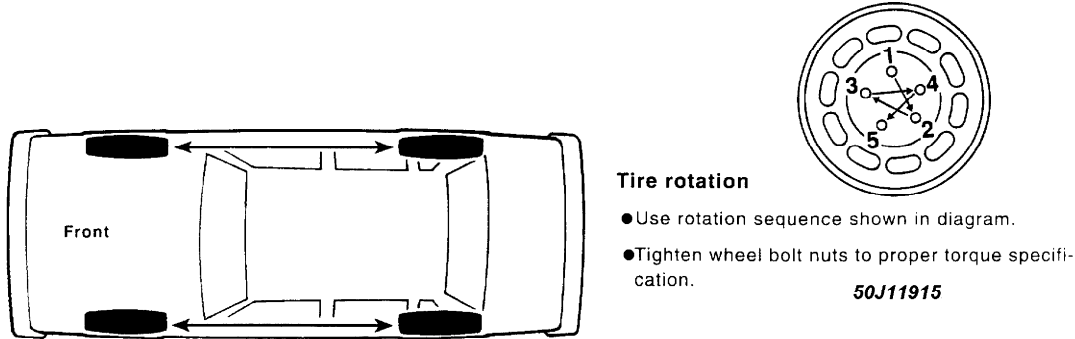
Tire Rotation Pattern & Lug Nut Torque Pattern
